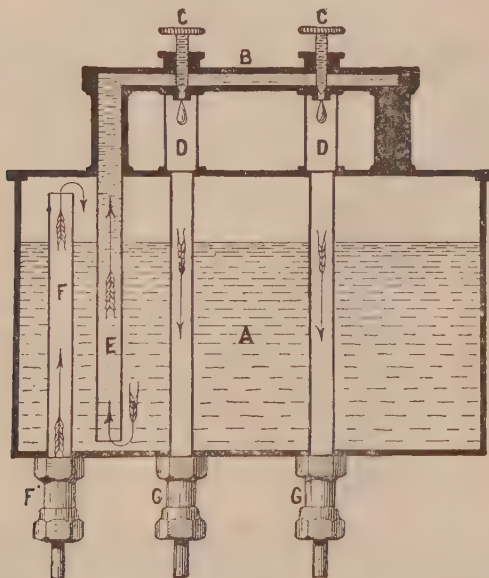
Typical force feed lubricator, operating by air or gas pressure instead of a pump. The parts are: A, oil reservoir; B, distributing pipe; C, C, valve screws for regulating flow of oil to parts, through leaders, D and D'; E, standpipe through which oil is forced by air pressure; F, standpipe admitting air or exhaust gases under pressure; F', union for pipe from crank case; G, G, unions for pipes to various parts of the machinery.
